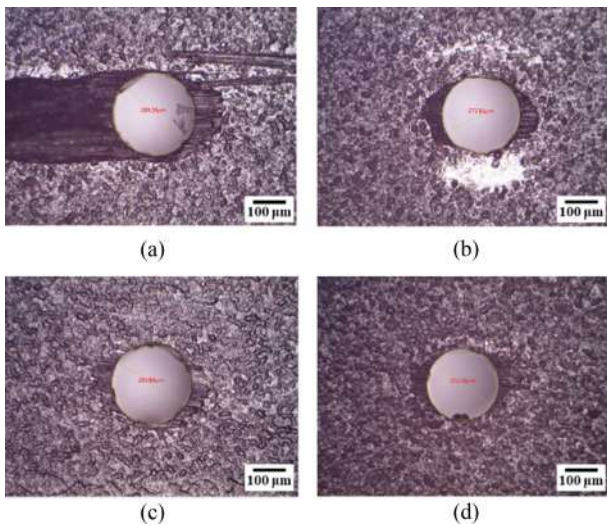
Machined holes by laser EDM hybrid process with different EDM conditions: 120 V, 10 nF (a) Front view, (b) Backside view; 90 V, 10 nF (c) Front view, (d) Backside view
